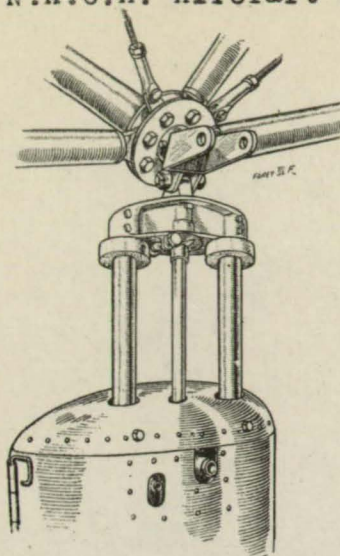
Fuselage "spool" wing root attachment and landing gear strut.
